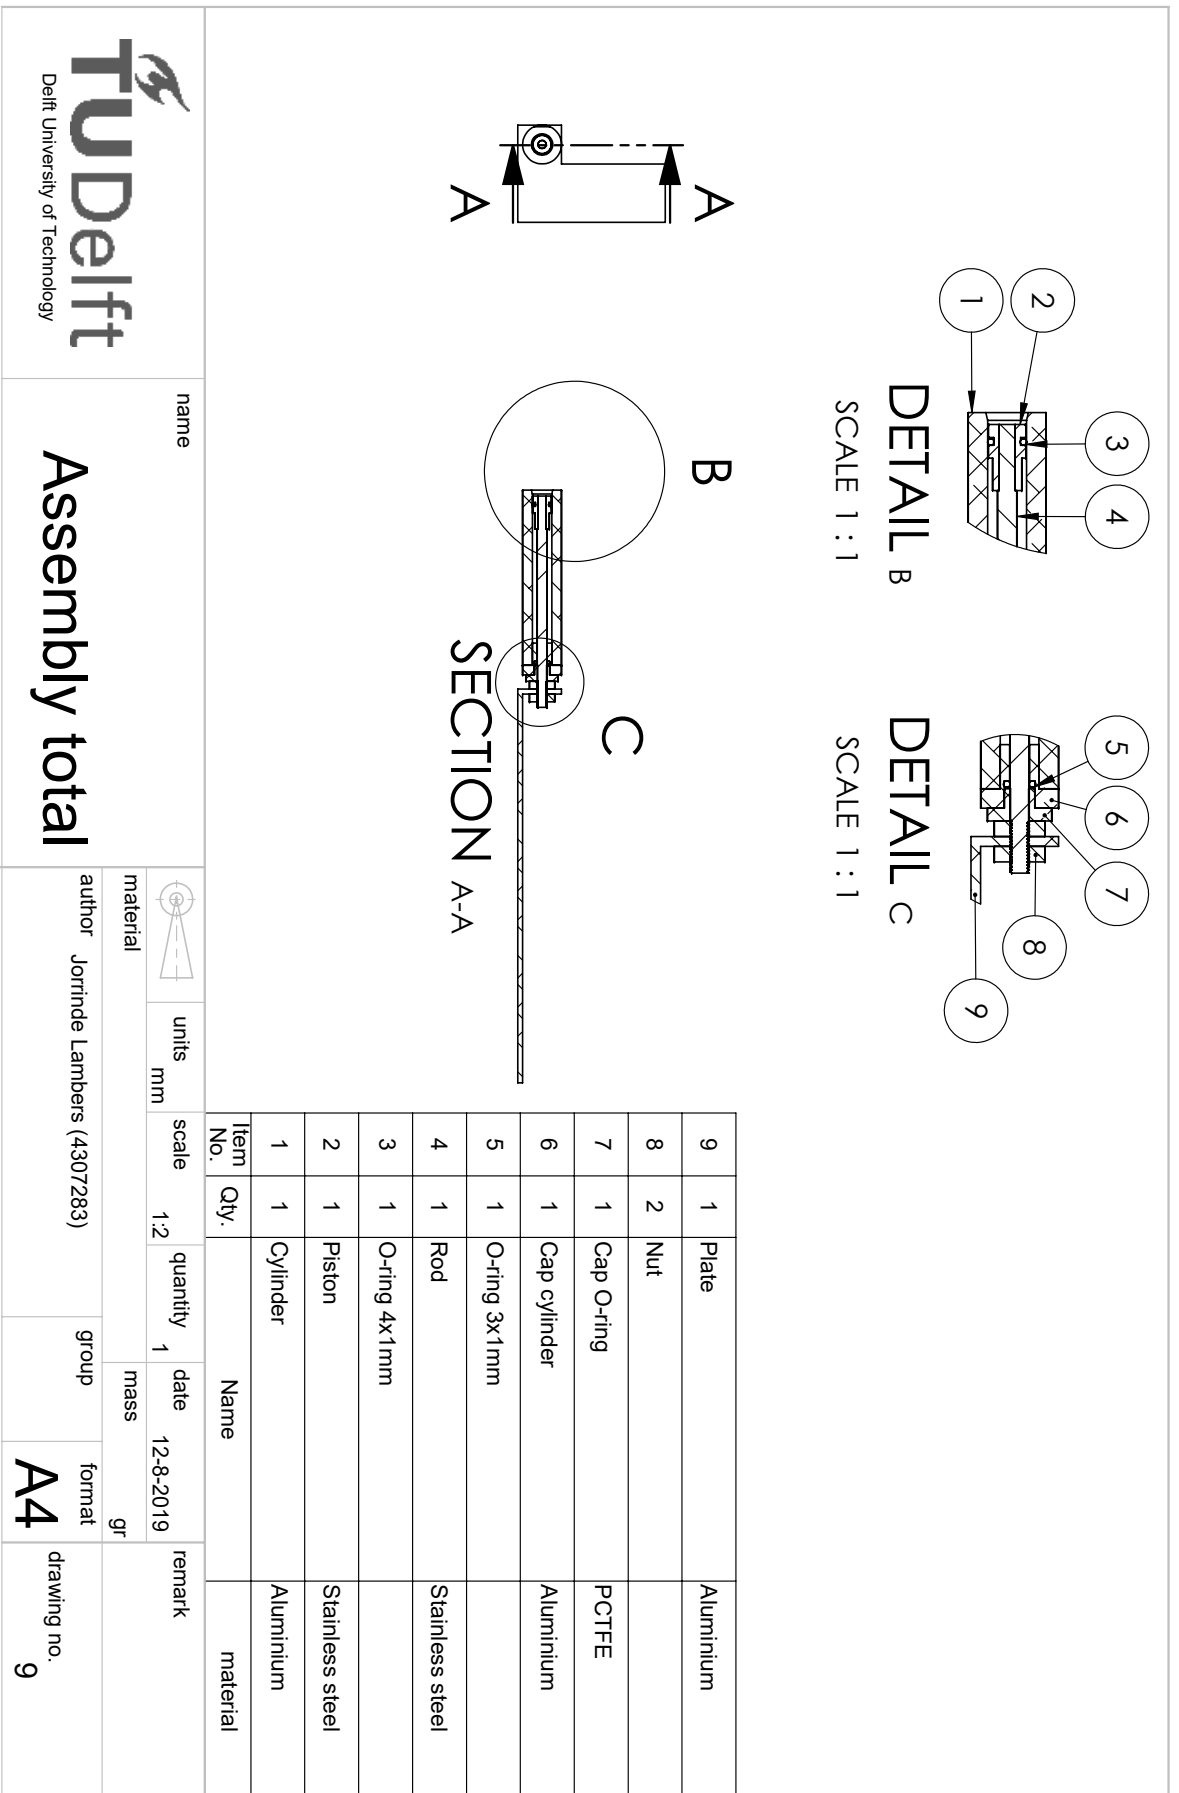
SolidWorks drawing of the total assembly (part 1 + part 2).
